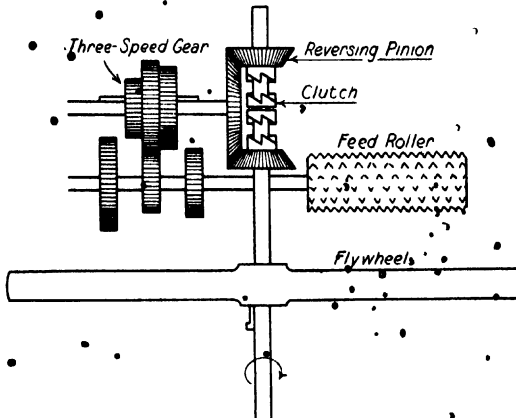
PRINCIPLES OF REVERSING GEAR AND MECHANISM FOR VARYING LENGTH OF CUT IN CHAFF-CUTTER.
